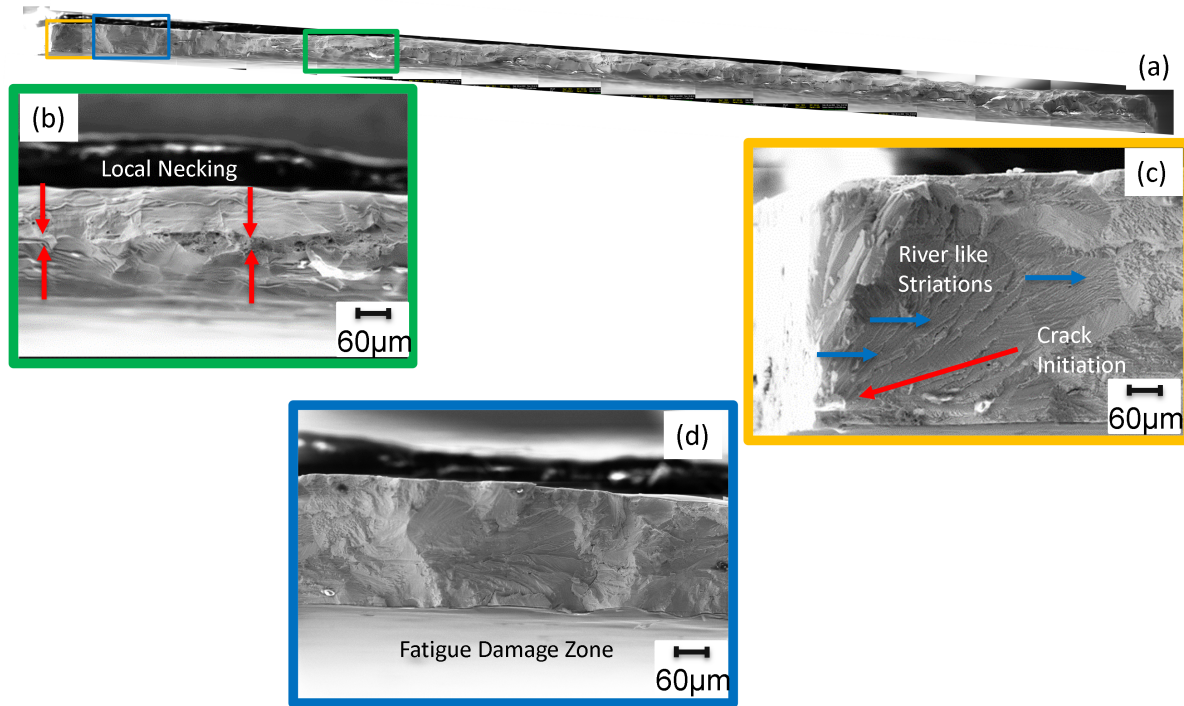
Fracture surface of single sheet sample at high temperature, high cycle fatigue, $N_f = 201,798$ cycles, (a) overall fracture surface (b) severe necking (thinning) (c) crack initiation zone (d) fatigue damage zone
